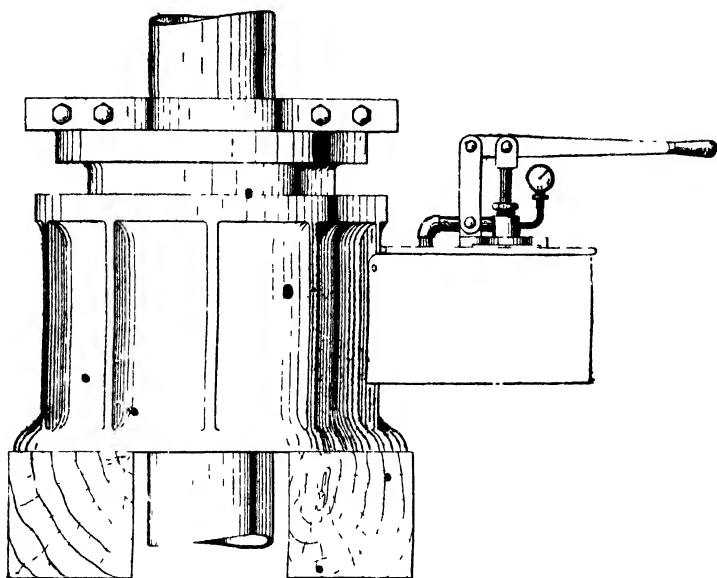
F.—C ISLER & Co's IMPROVED HOLLOW HYDRAULIC JACK FOR WITHDRAWING LARGE TUBES.
